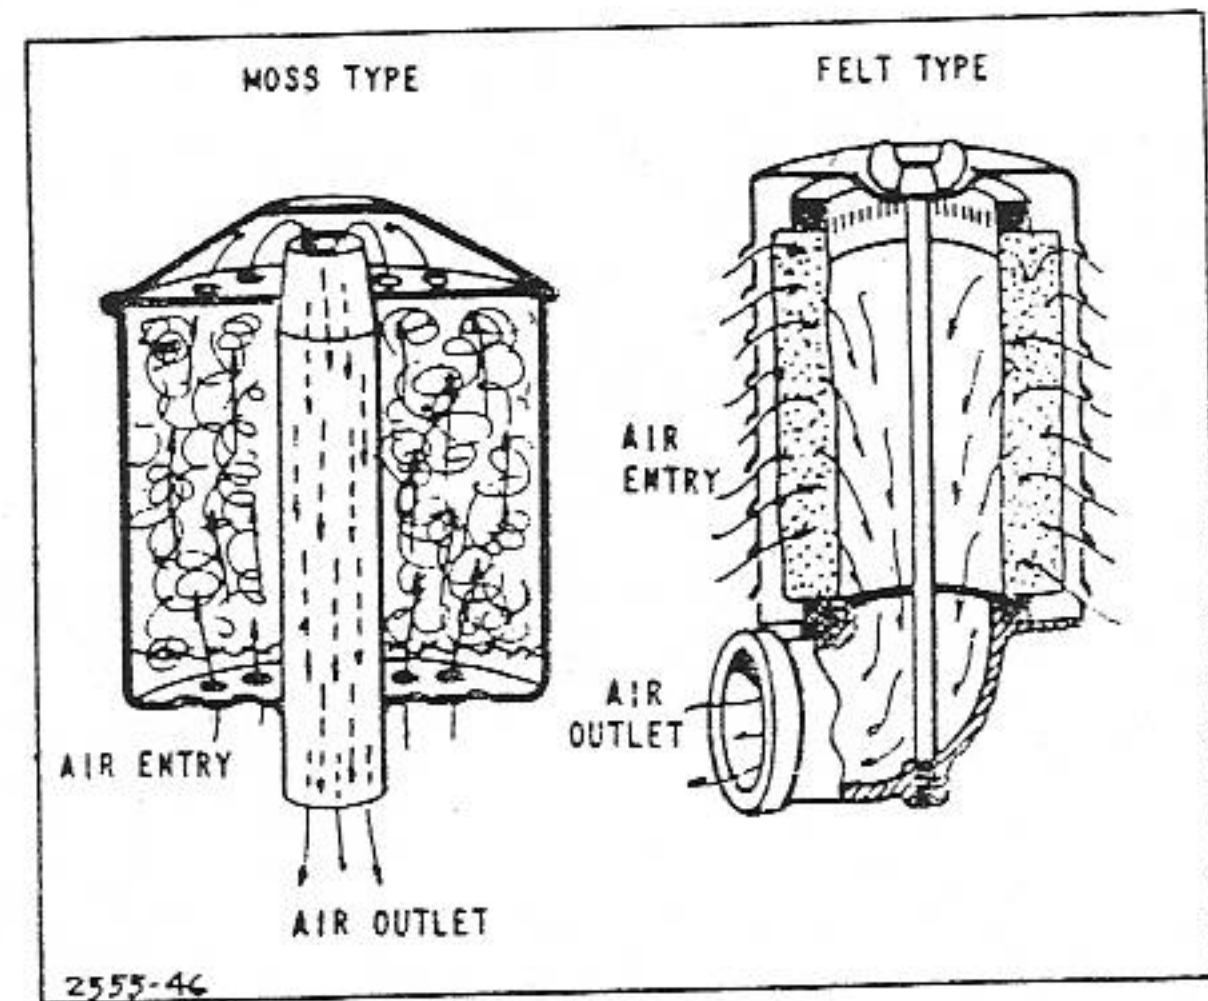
FELT AND MOSS TYPE OIL CLEANER
